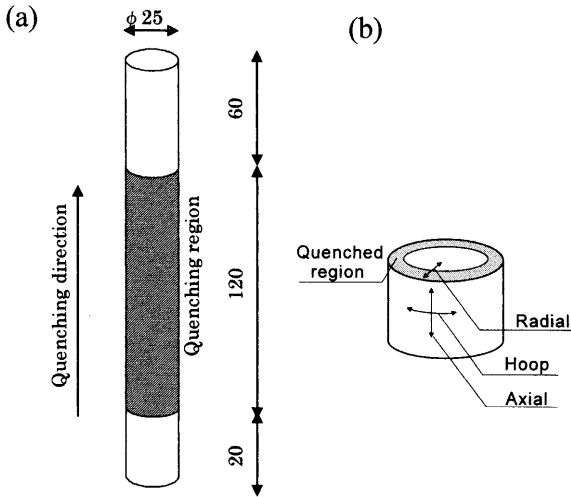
Shape and dimensions (mm) of a specimen (a) and (b) definition of three stress components, i.e., hoop, axial and radial stresses.
